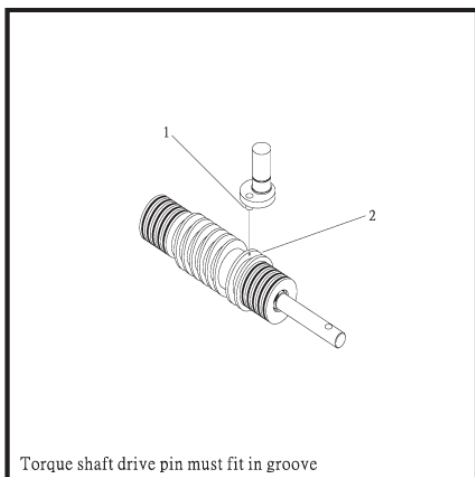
Drawing F. Disassembly gear sets (Refer to upper left Dwg E No. 4).
